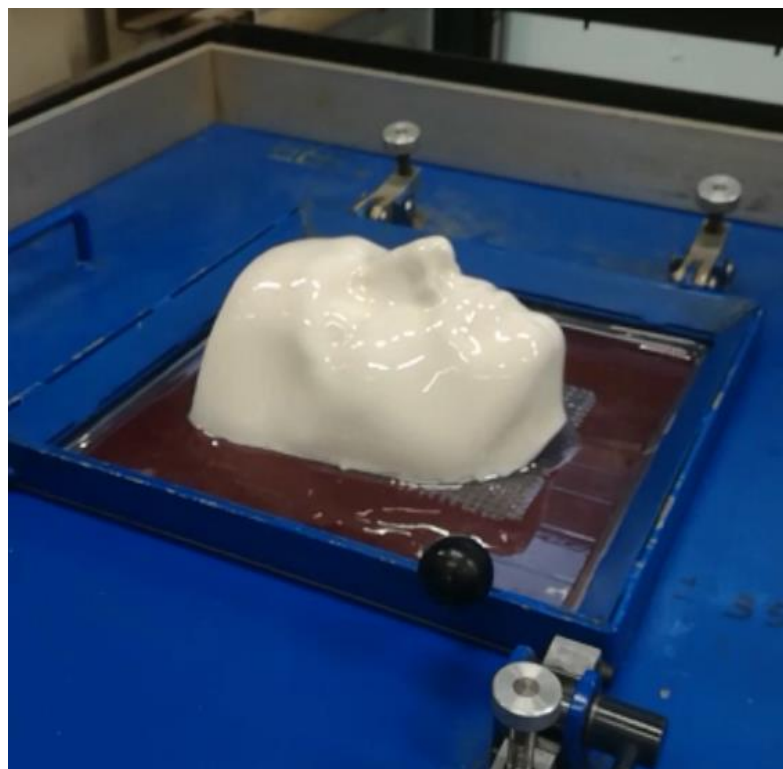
Vacuum forming of Silon-STS® over a 3D printed positive PLA mould
